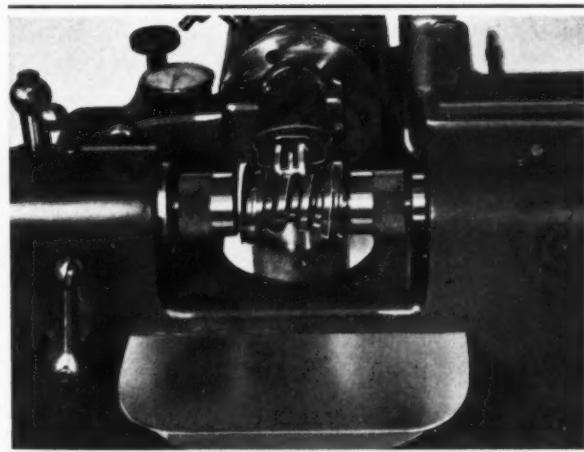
Close-up View of Hourglass Worm Undergoing Clearance Test in Machine Shown in Fig. 1
